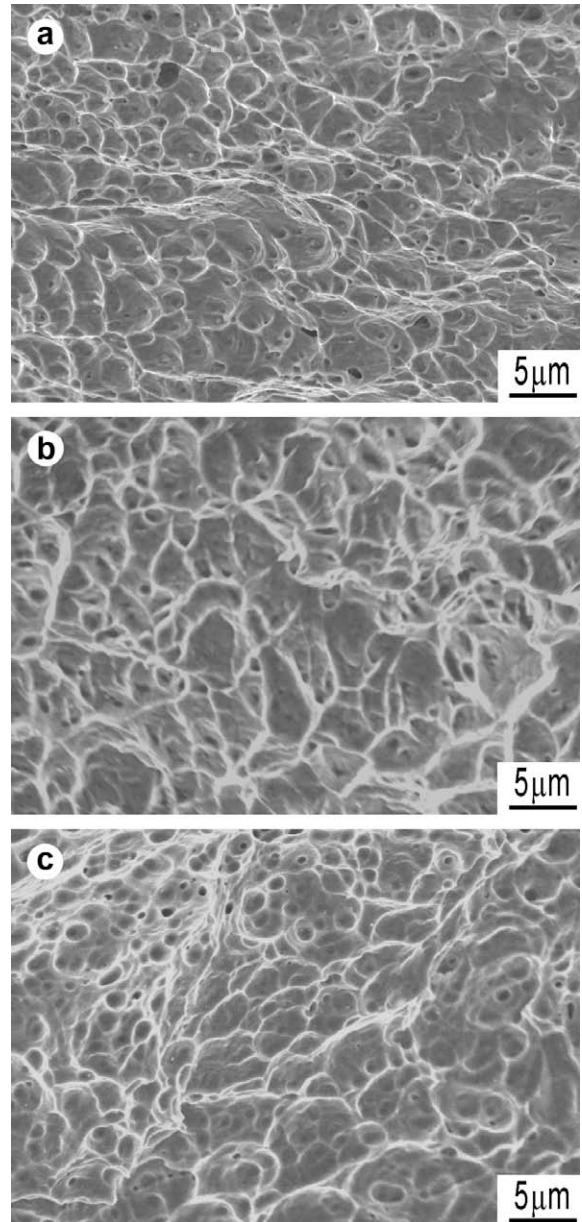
Scanning electron fractographs of cap weld face of ruptured tensile specimens formed using BOFs of (a) 0.00 mm, (b) 0.15 mm and (c) 0.30 mm.
